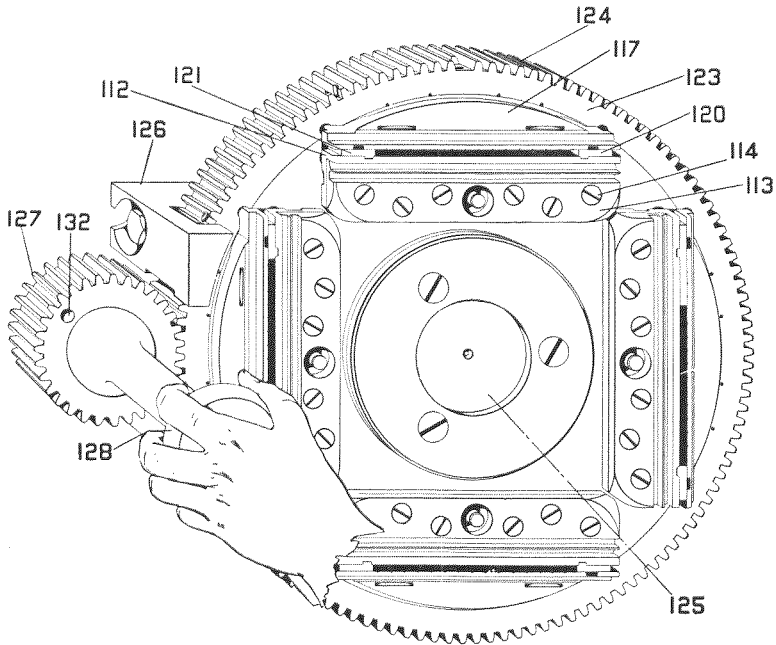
Perspective view of the mold disk containing four molds, described in another view. The mold disk 123 has teeth 124 cut in its circumference. The mold disk 123 is mounted upon the mold-disk stud 125. In some of the machines there is a water-cooling arrangement by which water is circulated around the mold-disk stud to keep the mold disk cool.
